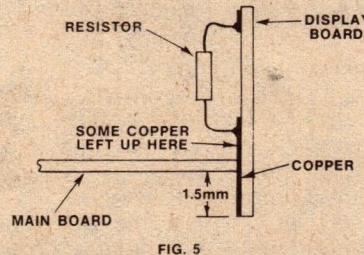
Details drawing showing how the main board and the display board are soldered together.
